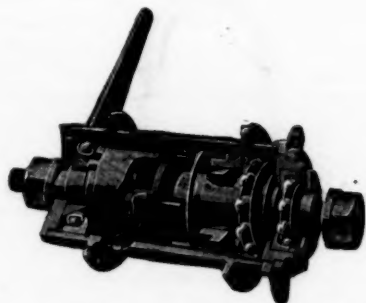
Coaster Brake with Portions of Shell and Interior Parts Cut Away.
